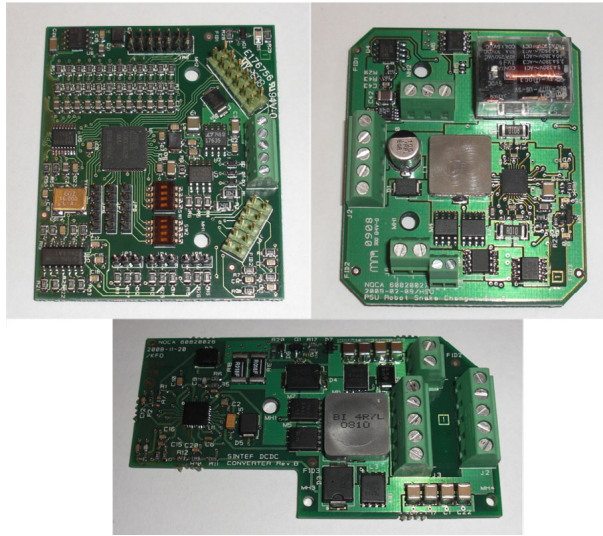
The three custom-designed circuit boards located in each joint module. Top left: Microcontroller card that controls the joint mechanism. Top right: Battery charger card. Bottom: Motor power supply card.
